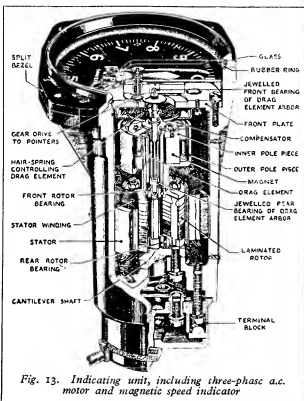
Indicating unit, including three-phase a.c. motor and magnetic speed indicator
